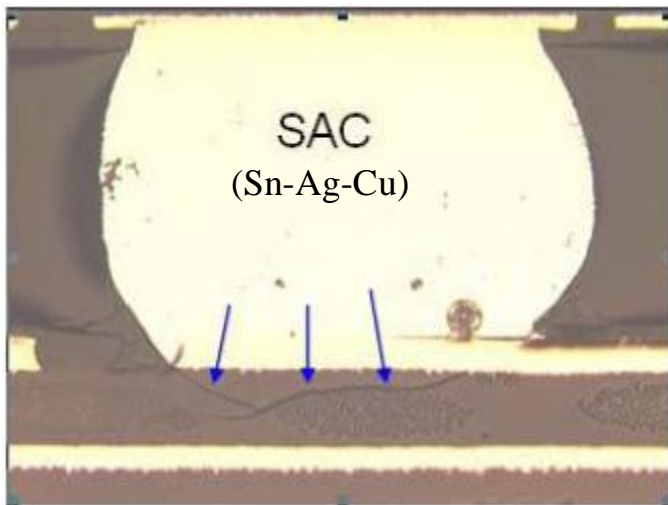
Printed circuit board (PCB) laminate crack under ball grid array (BGA) [13]
